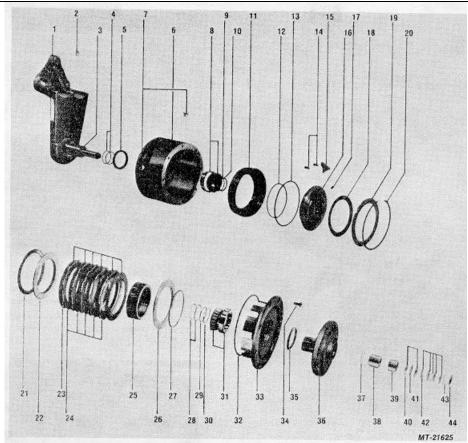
EXPLODED VIEW OF FAN CLUTCH LEGEND FOR FIG. 3
